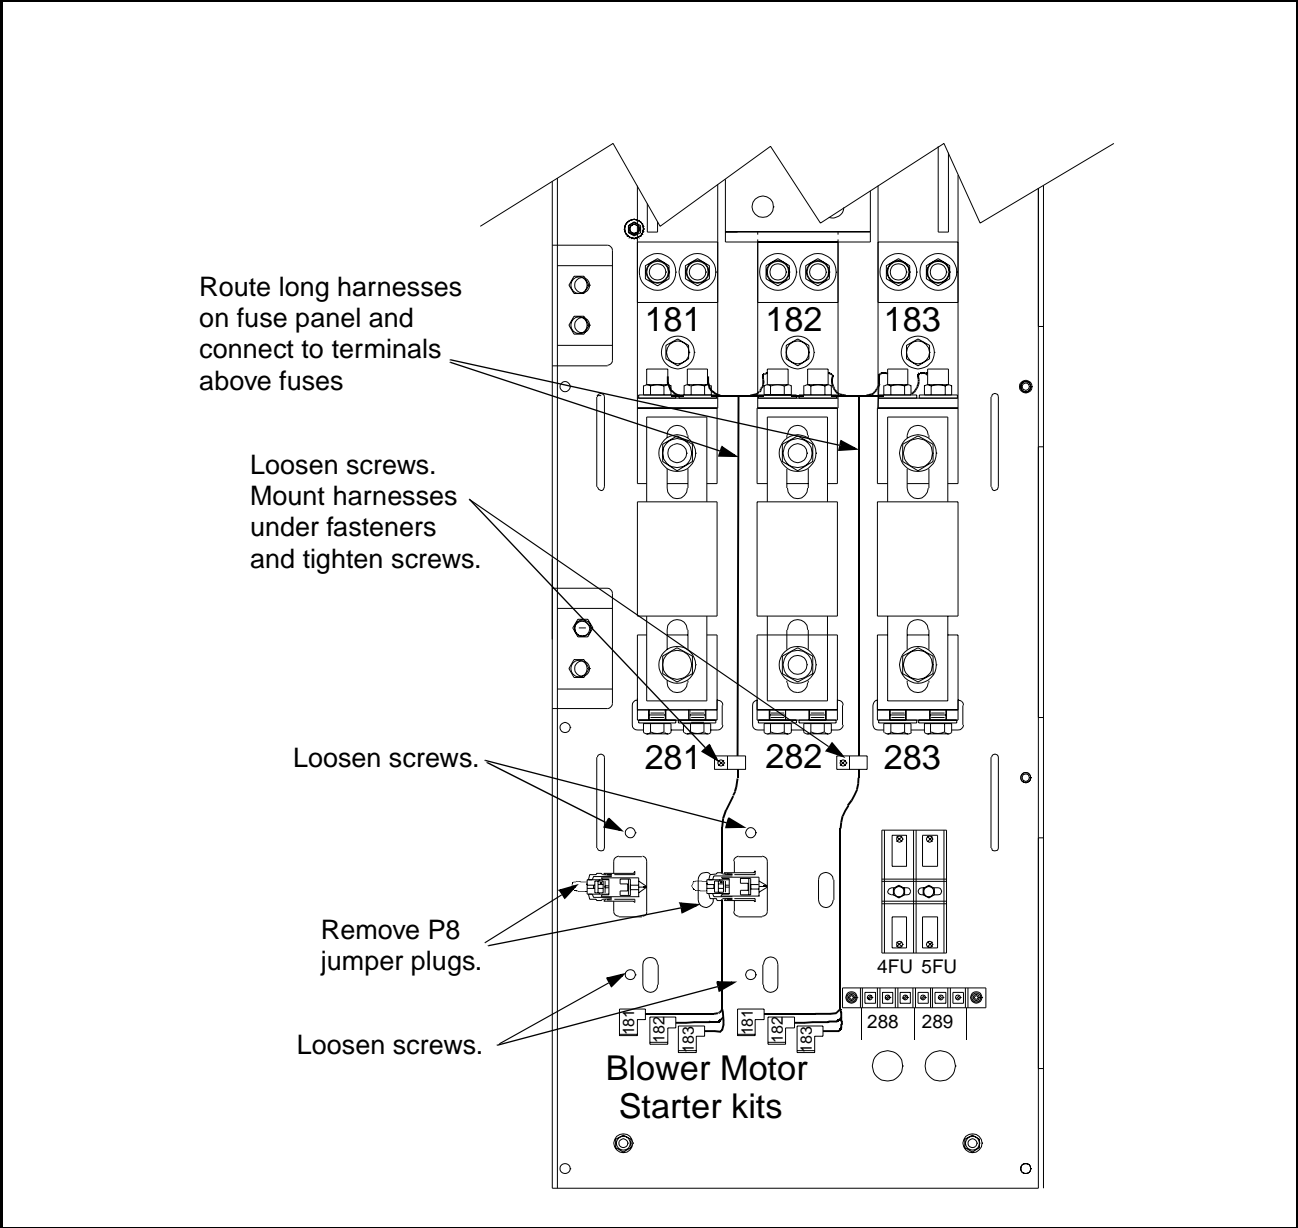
Mounting the Starters on the Drive Line-Fuse Panel (400 HP to 600 HP @ 460 VAC)
